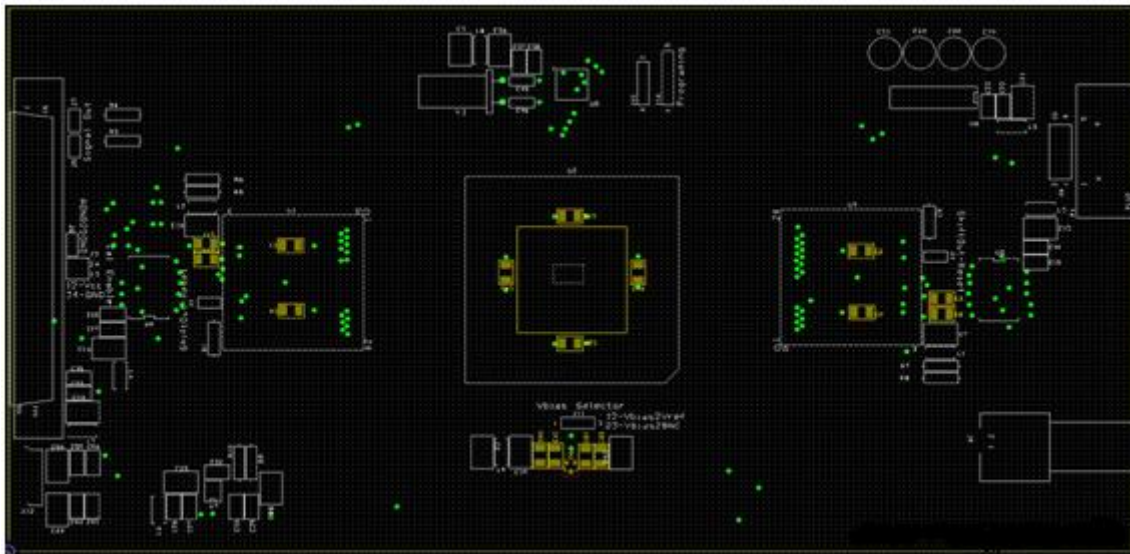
Serigraphy layer. Layer showing components to be soldered on the board.
